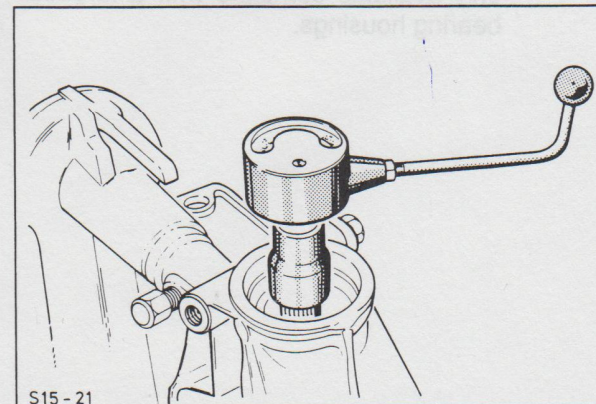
Check turning torque of drive pinion (preload gauge 15-041).
